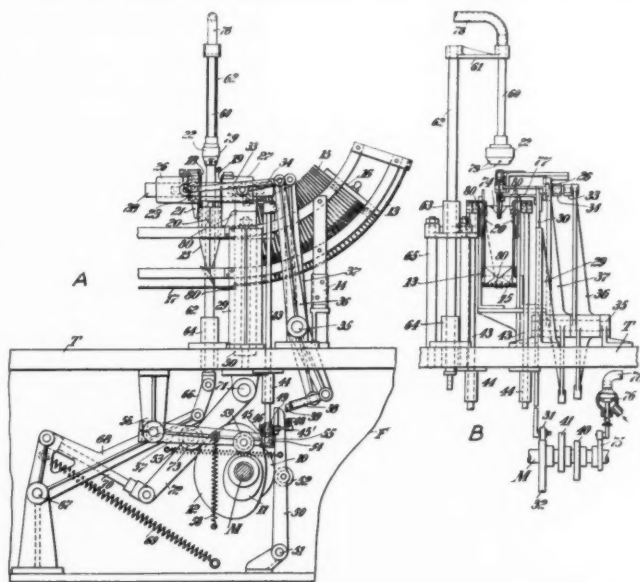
Compressed air and lever mechanisms automatically open square bottom paper bags
